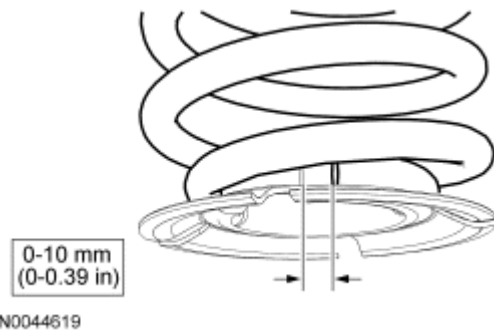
Positioning Spring Onto Lower Arm With End Of Spring
